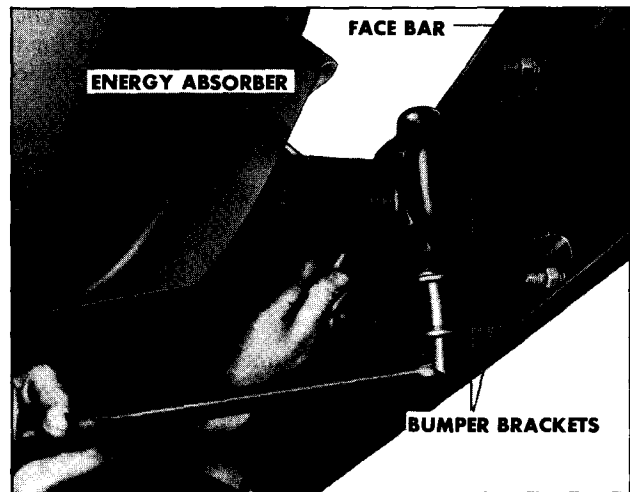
Removing Rear Bumper Bracket Thru-Bolts
